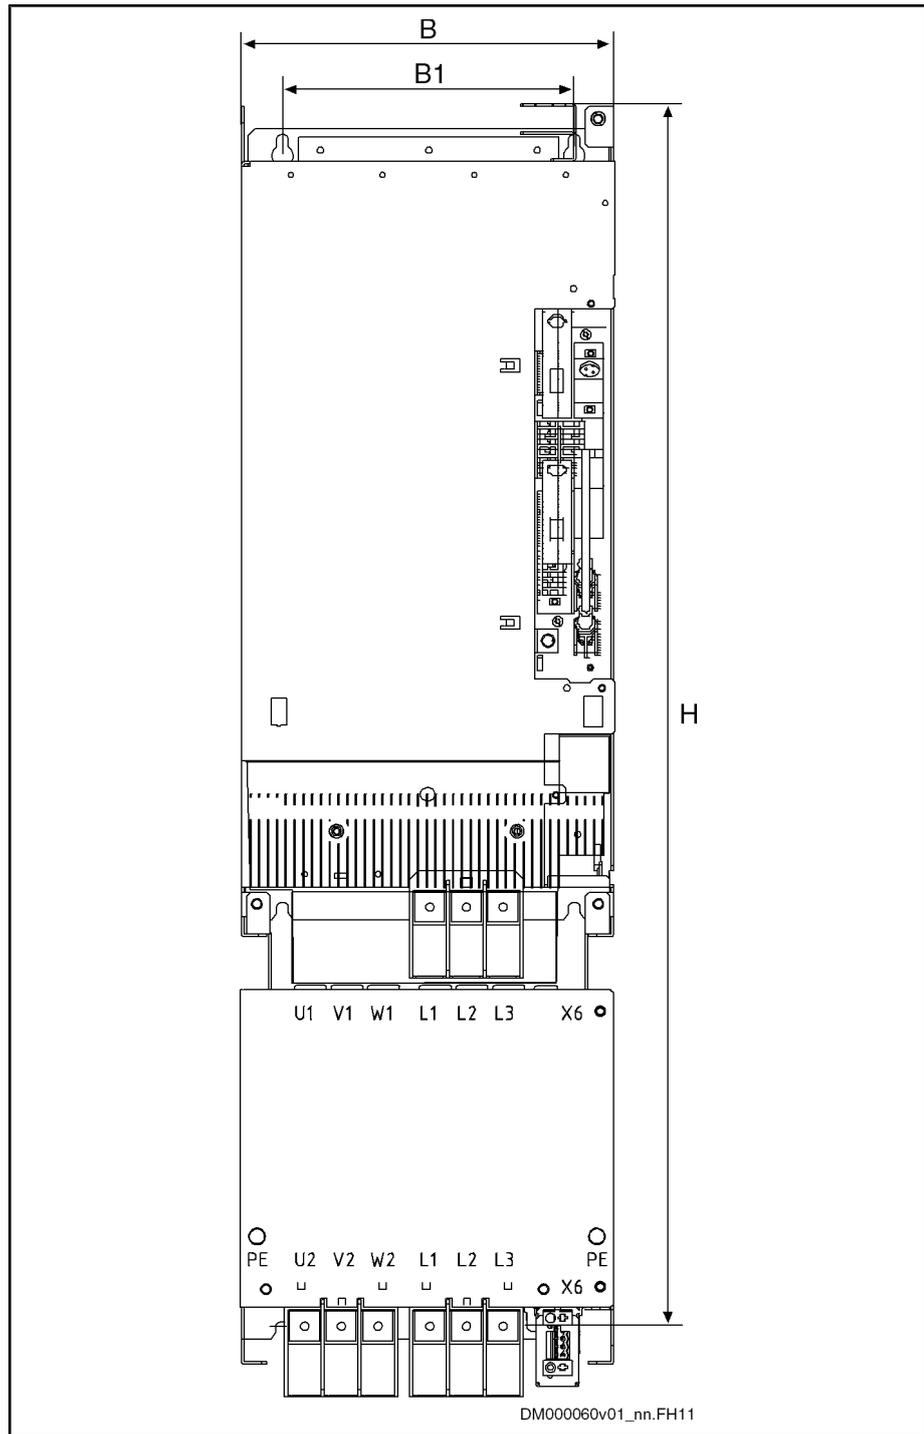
Sample mounting HCS03.1E-W0100, -0150, -0210 / motor filter
